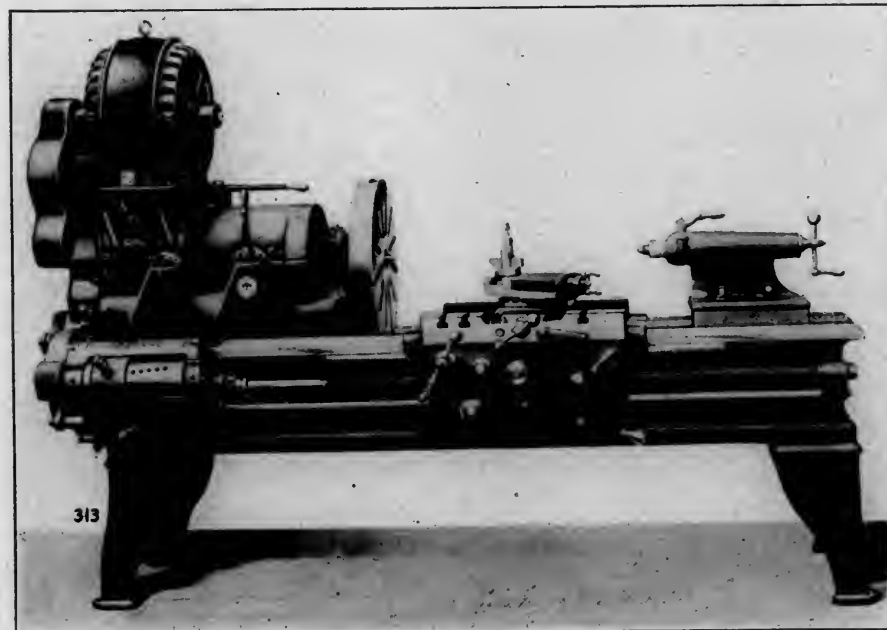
APPLICATION OF CONSTANT SPEED MOTOR TO LATHE.
